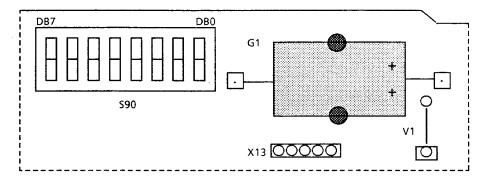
Mounting position of the battery and DIP switch S90 for setting of the receiver configuration (cf. section 4.3.4)
